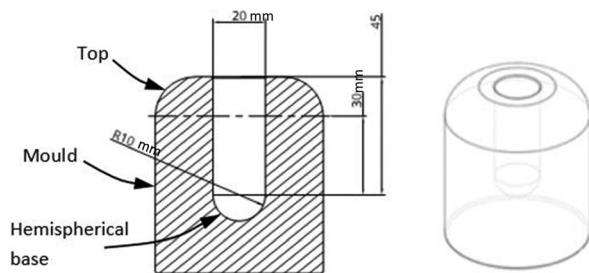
Shape and dimensions (mm) of freeze cast mould.
